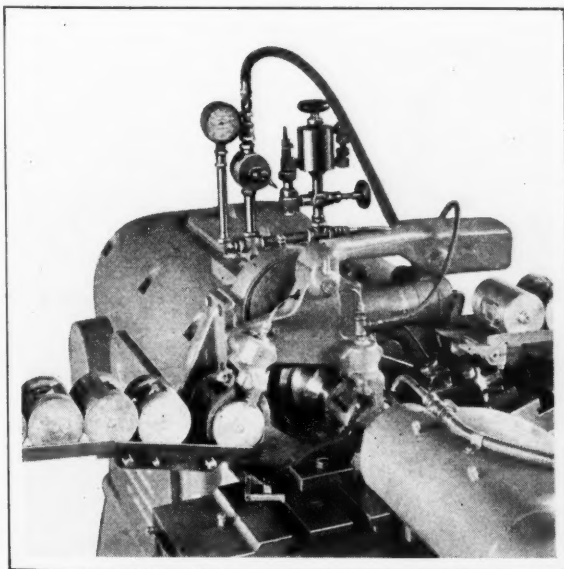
"Lo-Swing" Piston-turning Automatic Showing One "Hand" Gripping a New Piston While the Other is Ready to Remove the Finished Piston
